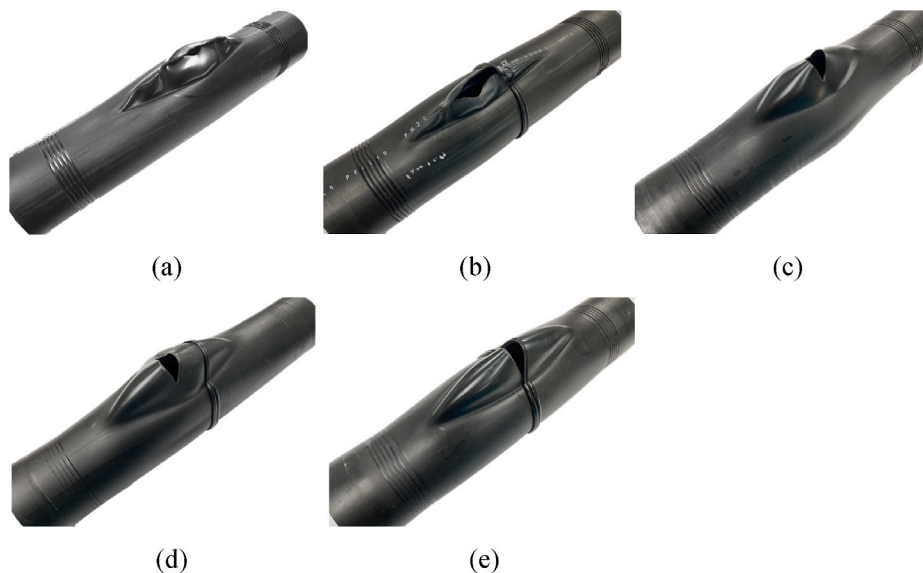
Typical ductile failure of end-capped polyethylene pipe under quick burst internal pressure. At 23 °C (a) pipe, (b) butt fused pipe. At 80 °C, (c) pipe, (d) failure near and (e) away from the BF joint.
